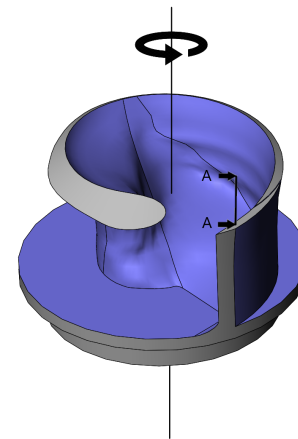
Detailed view of the impeller. Marked section A-A indicates location of data in Fig. 10.
